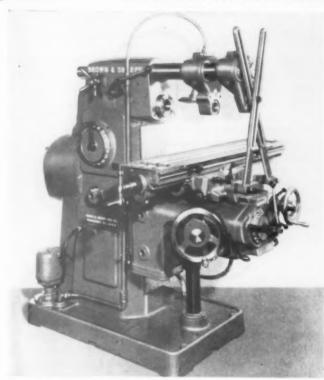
, a late model Universal Milling Machine—the No. 2 by Brown & Sharpe Mfg. Co., Providence, R. I.—which may be considered typical of ultramodern millers. Engineered for manufacturing as well as tool work, and provided with 2-way swivelling vertical attachment and universal dividing head, and other accessories, a machine of this type is capable of an infinite variety of work, gear cutting included. For example, the part shown in Fig. 2 can be machined with only three settings and three changes of cutters.
